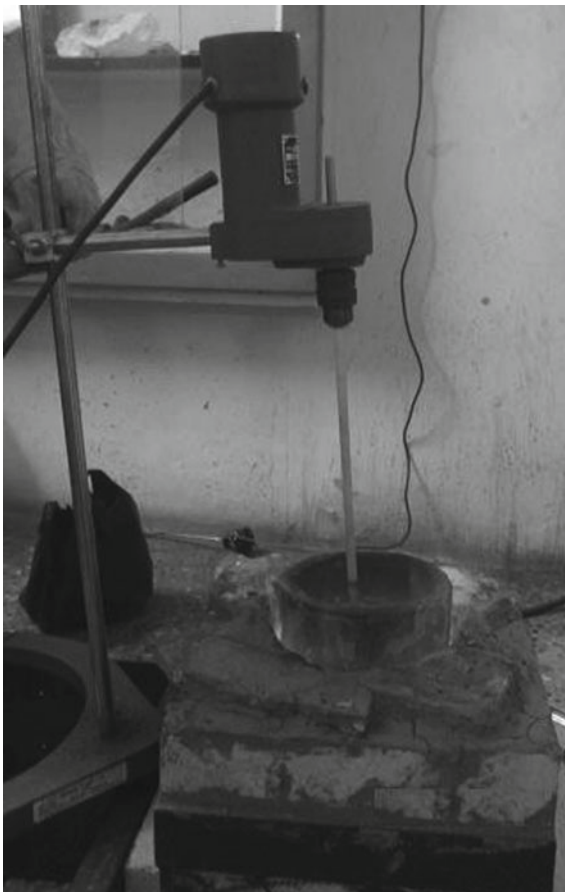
Pouring mixture MMCs in wedge-shaped die
